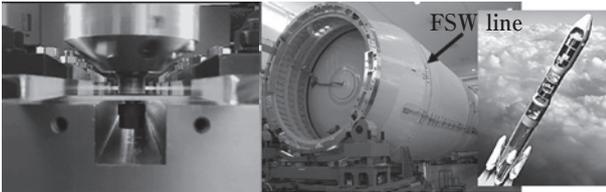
Hollow construction by the self-reacting FSW technology for a H-IIB rocket fuel tank.
